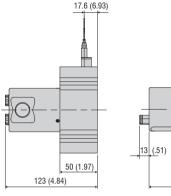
Dimensional drawing WDS- XXXX -P115 - U/I
